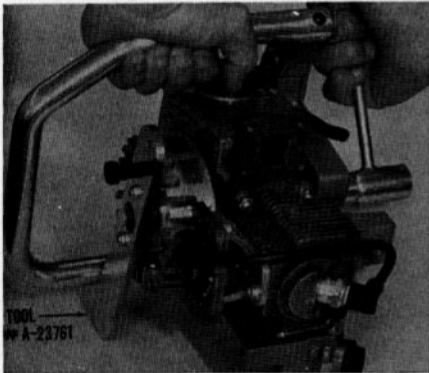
Using Homelite tool No. A-23761 to keep crankshaft from turning while removing clutch retaining nut and clutch rotor. Homelite tool No. A-23696 is used to remove or install clutch rotor.
